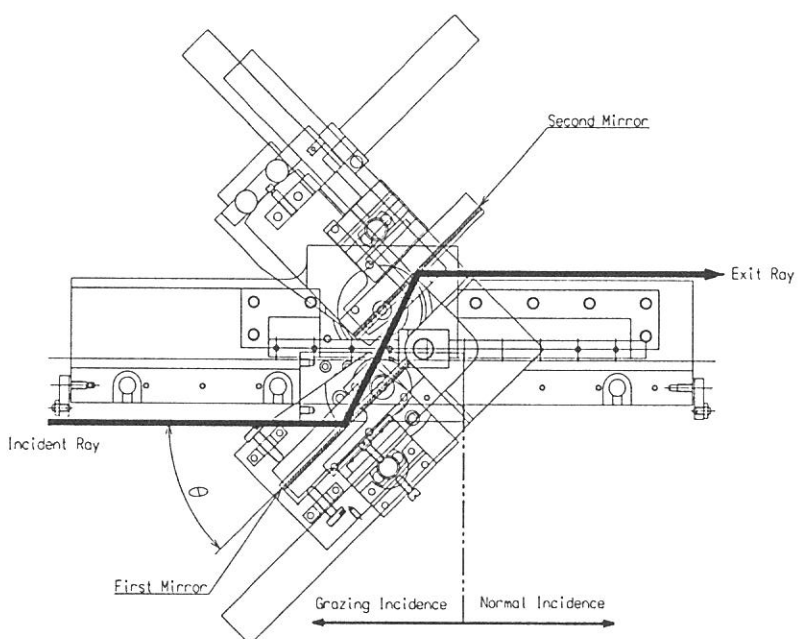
Mirror holders and driving mechanisms of the double multi-layered-mirror monochromator.
